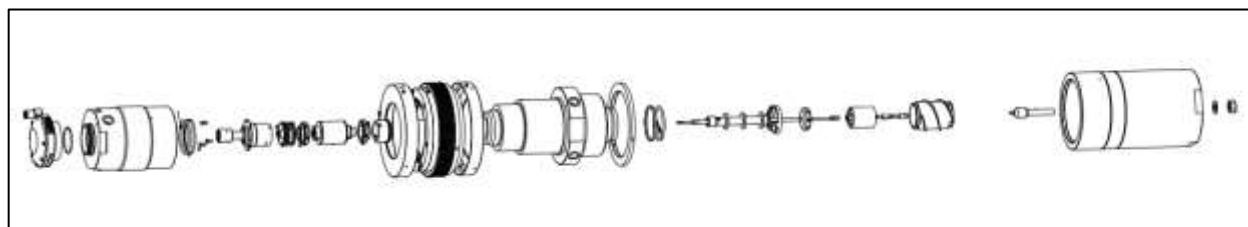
Exploder View of The Chandler 7600 HTHP Viscometer
